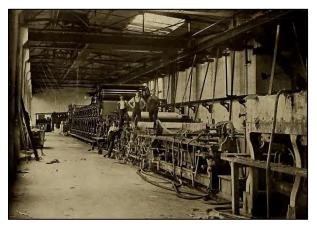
"Paper mill screens, wet machines, and grinders," 1909
